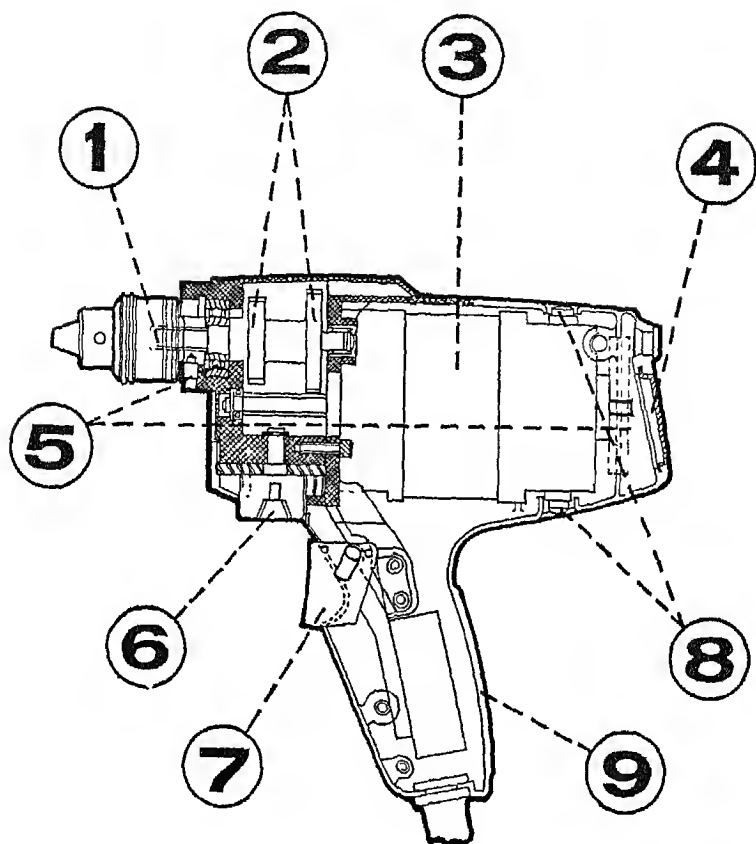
The Selectamatic Drill—main parts.* 1. Three-jaw engineers' type chuck. 2. Helical gears. 3. Cartridge-type motor. 4. Multi-louvre ventilation. 5. Front and rear bearings. 6. Speed-change bush (fast or slow). 7. Pressure squeeze switch. 8. Extended depth brushes. 9. Hand grip.
